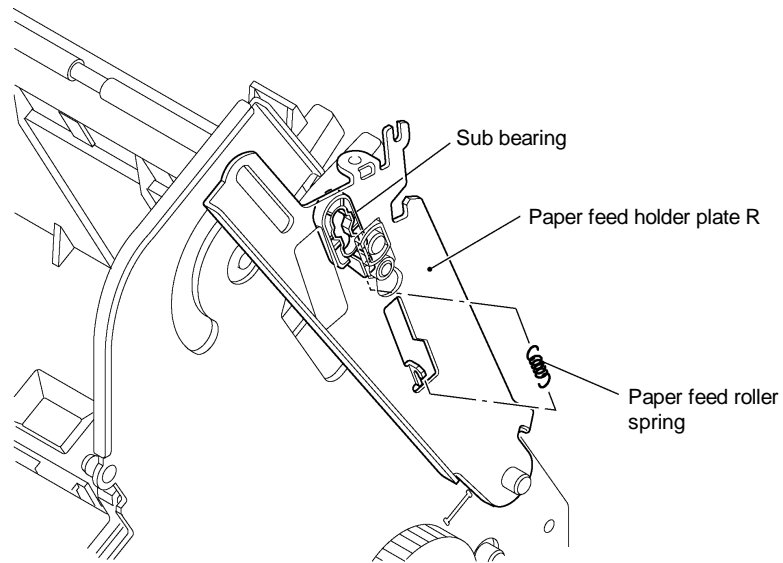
Installing the Paper Feed Roller Assy 2
